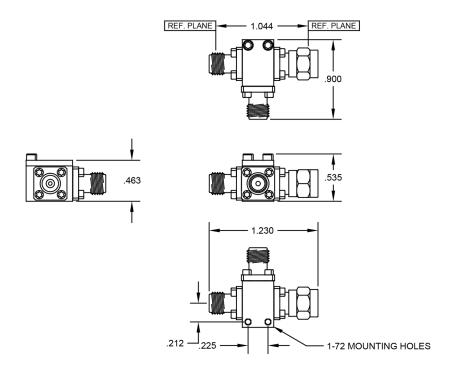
HL9464 mechnical drawing (opt. -JPJ)
